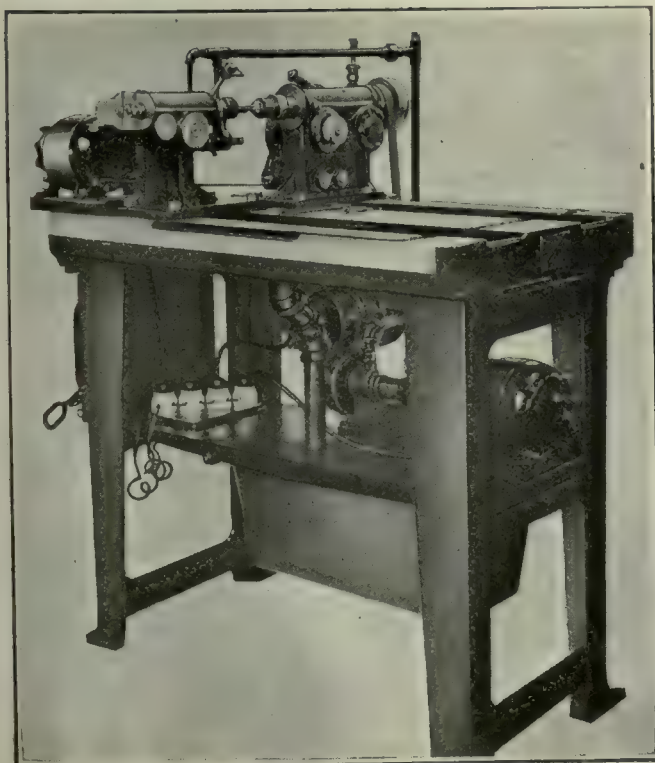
KINGSBURY AUTOMATIC SENSITIVE DRILLING MACHINE
